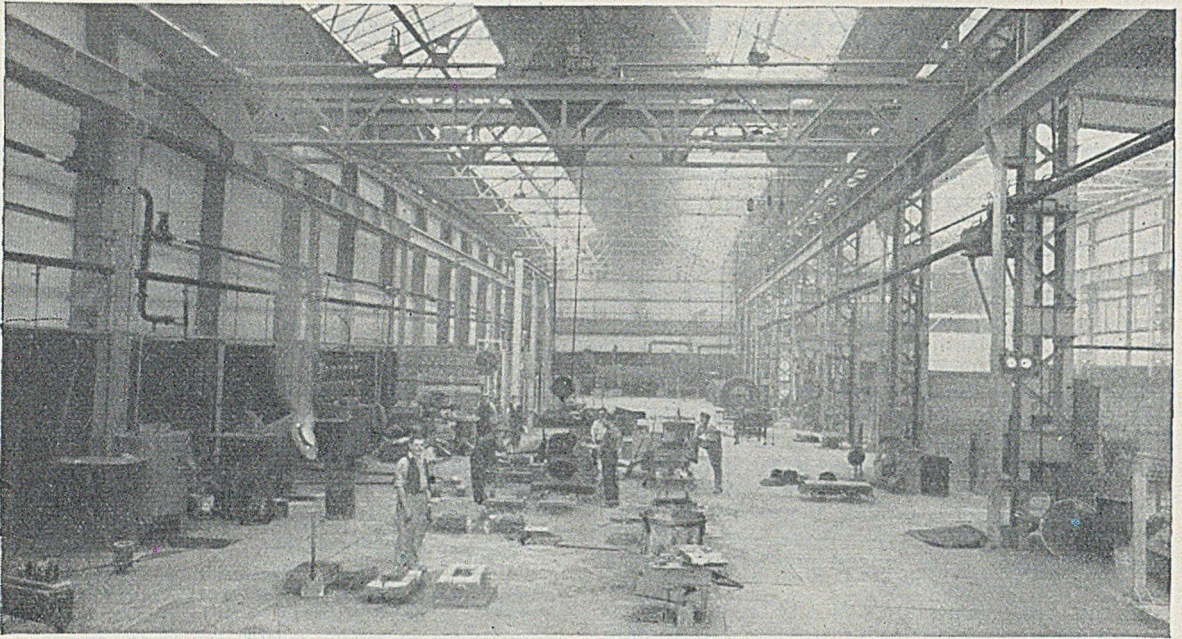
General View of the Small Bay, showing a Battery of Three, Waterhouse Crucible Furnaces, Moulding and Coremaking Sections and Mould and Core Stoves.
